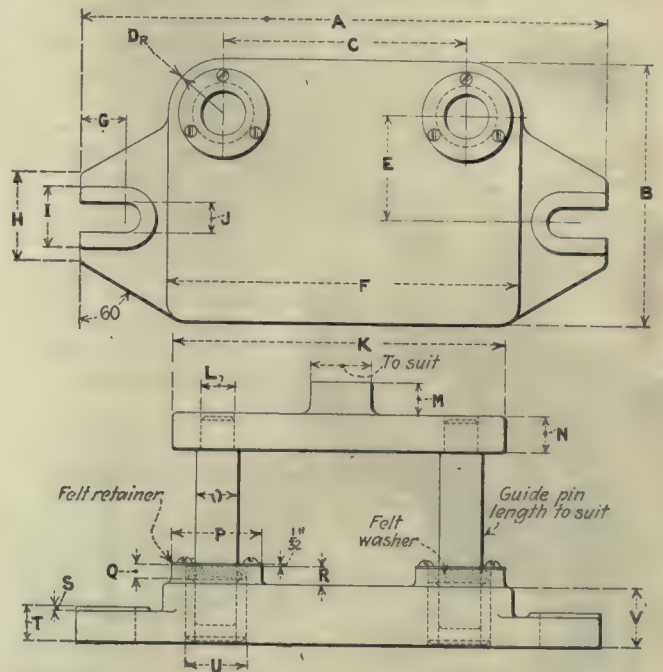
DIE FOR LARGE BLANKING, SHOWING GUIDE PINS AND STRIPPER DESIGNS
